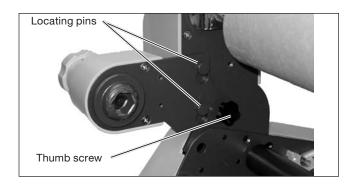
Top Supply Shaft Brake Assembly in the Rear Position.
